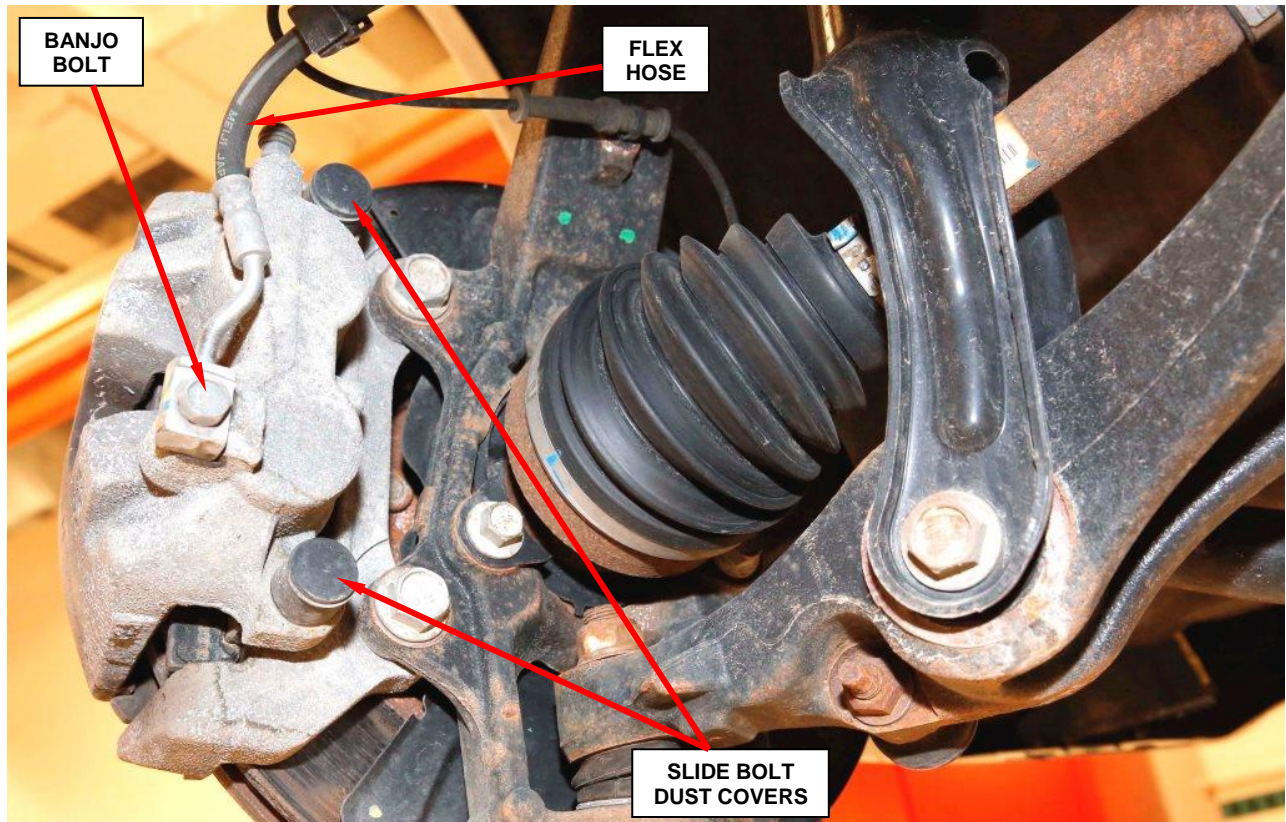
Brake Caliper Flex Hose Banjo Bolt and Slide Bolt Dust Covers
